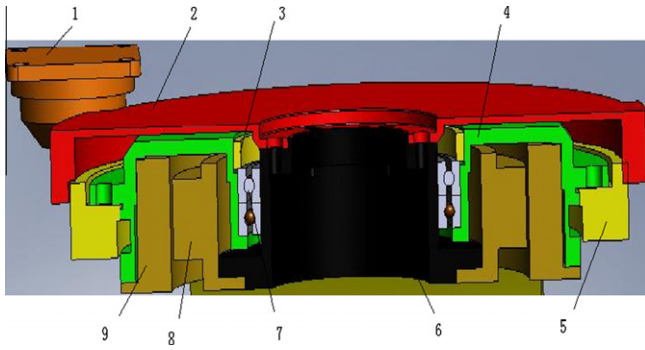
Shafting structure. (1) shock absorber (2) motor enclosure (3) end ring (4) outer shaft of the motor (5) inner frame (6) inner spindle of the motor (7) bearing (8) electric machine rotor (9) electric machine stator.
